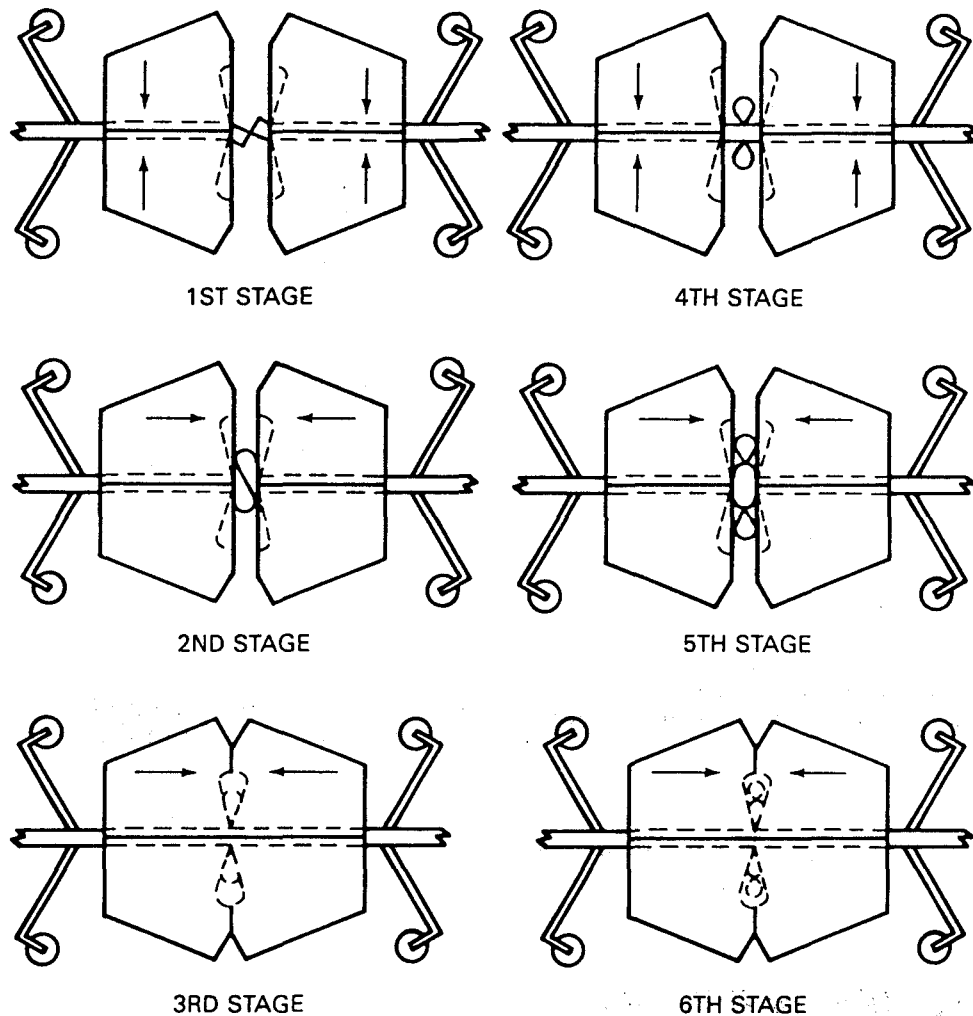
Stages in Multiple Upset Welding of Butt Joints Between Strips
